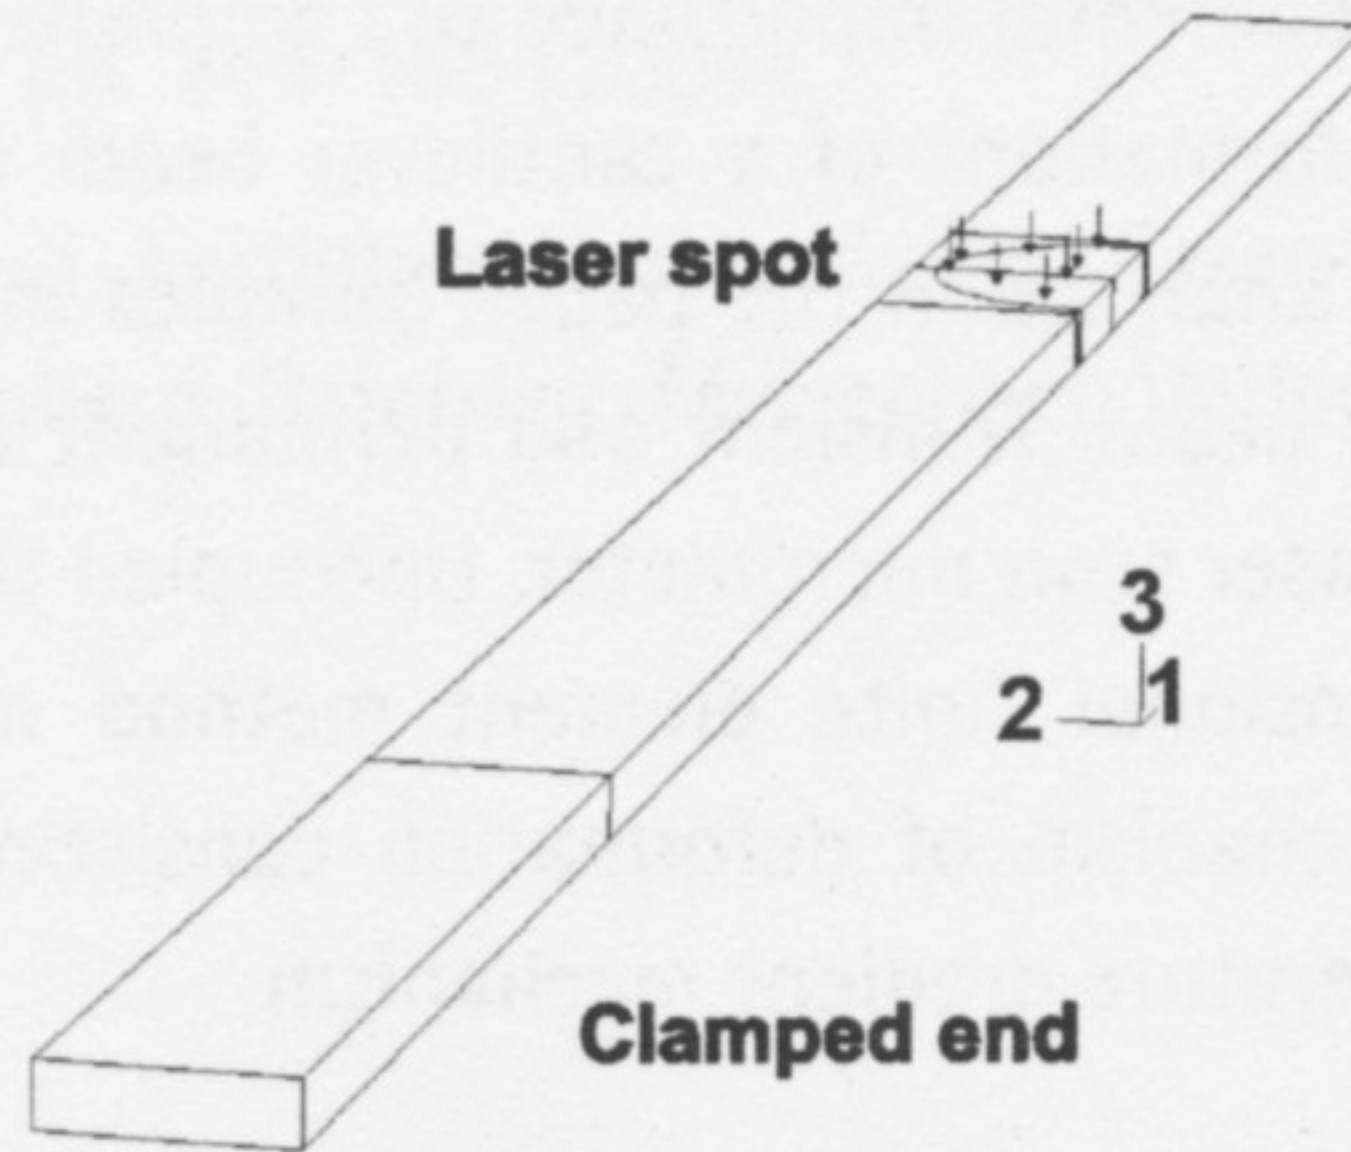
Schematic of experiments - cantilever beam heated with a laser beam. View of a half of symmetric specimen
